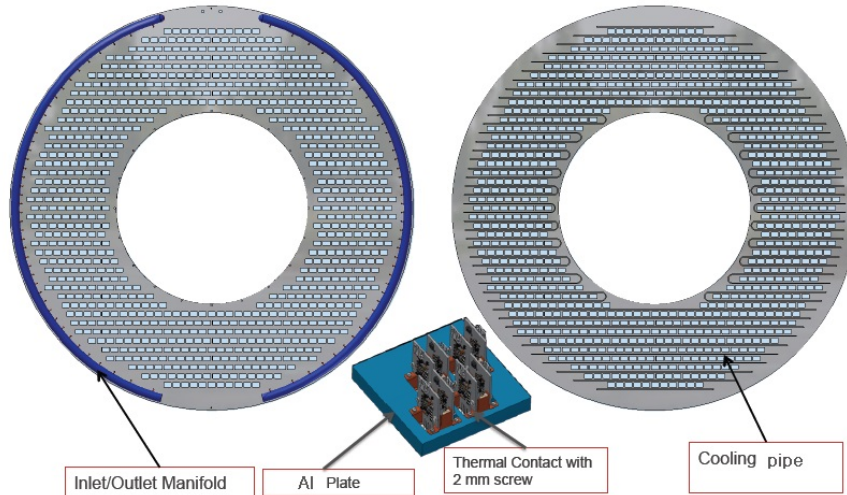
Schematic design of the front-end plate which provides the mechanical support to the front-end electronics boards. A structure of cooling pipes is routed in the space available in the front-end plate and is placed in contact with the copper mechanical supports of the front-end boards.
